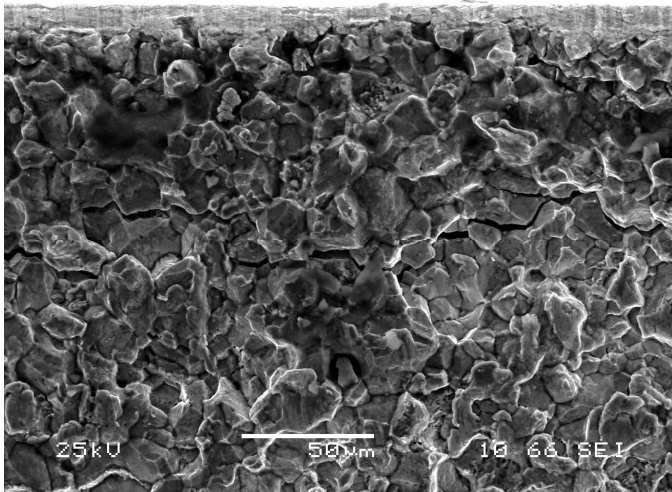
Representative photograph at the surface showing intergranular fracture.
